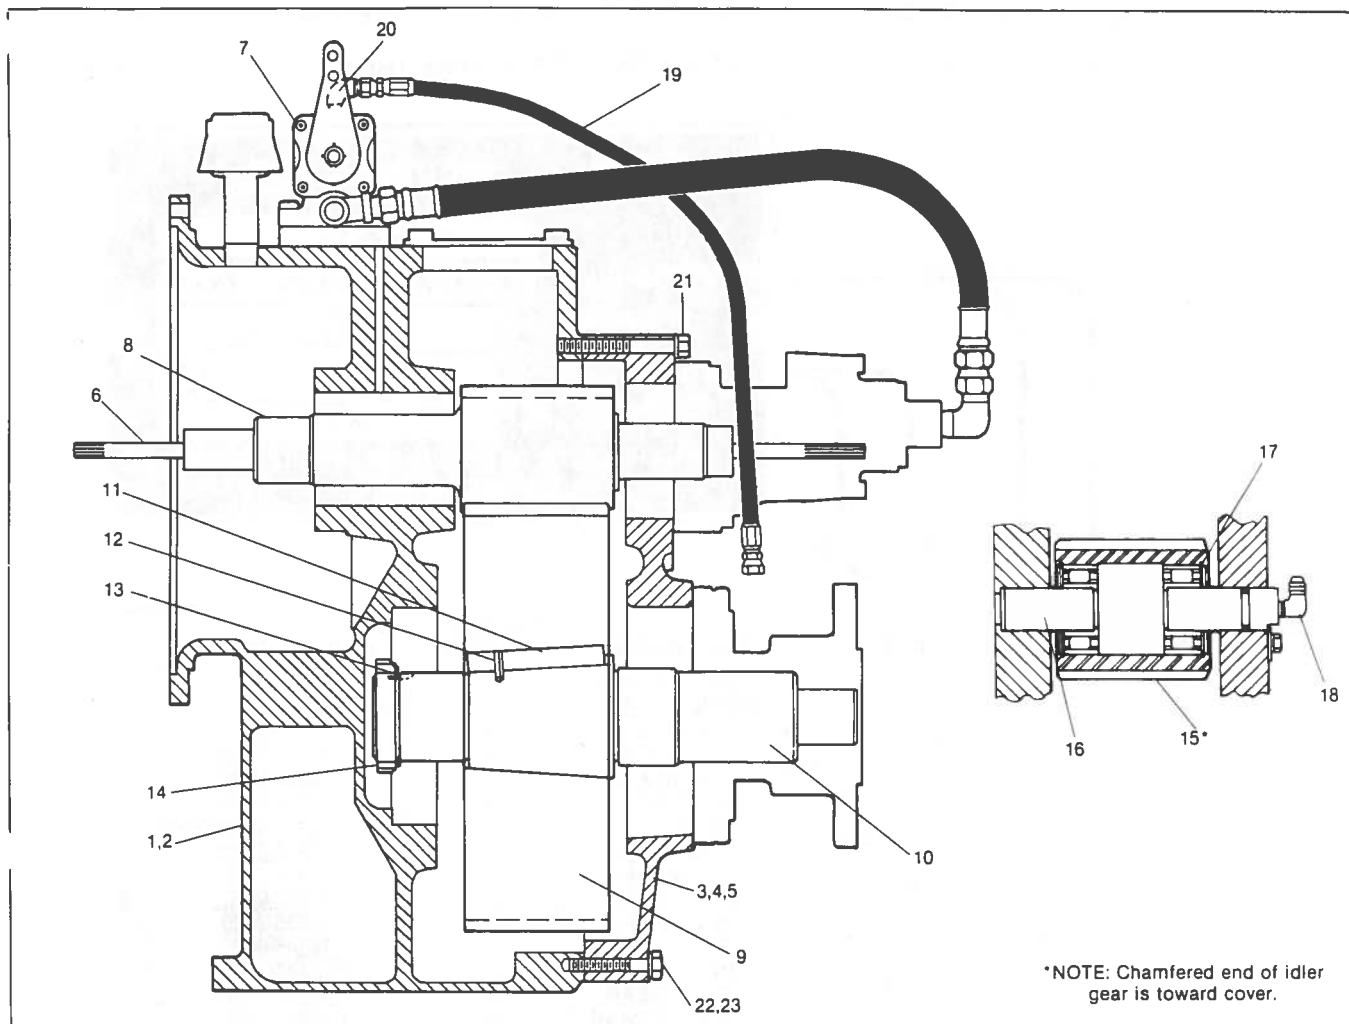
Cross-Section View Showing Parts only found on HE-10700 Units with 4.533 AER, 4.526 ER, 5.00 AER and 5.00 ER Ratios.
